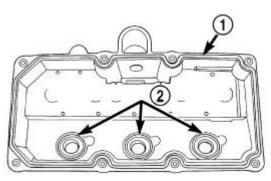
Camshaft, Rocker Arm Assembly & Cylinder Head Courtesy of CHRYSLER LLC
